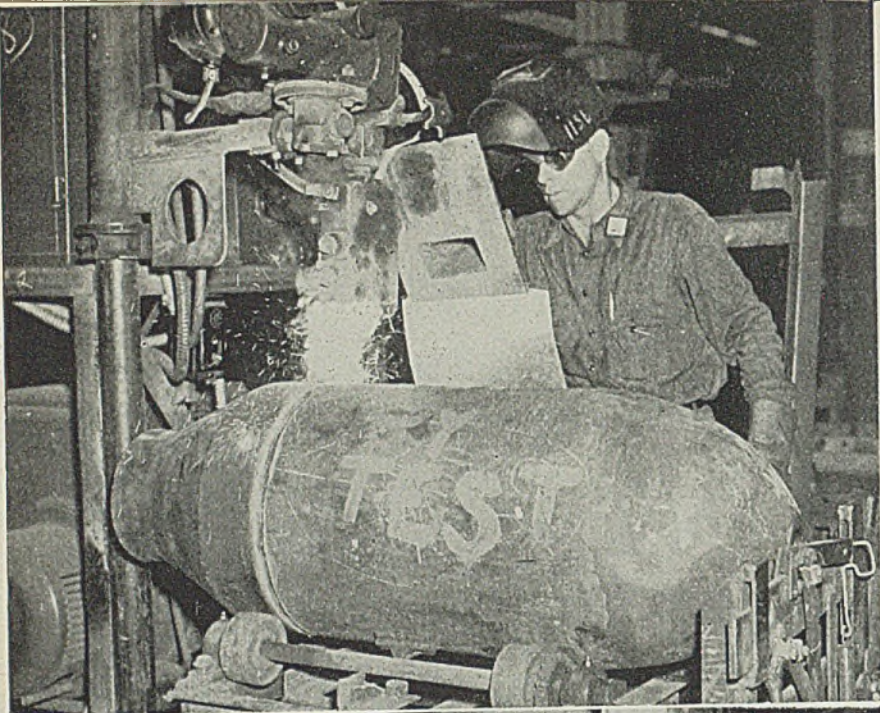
(Top)—Nose and tail sections are joined by girth seam weld after tacking in position. Bomb is located on cradle by power while continuous seam is made by automatic arc welding machine
